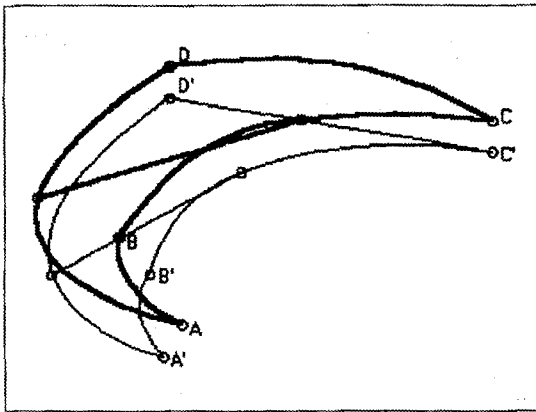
A top and bottom view of a flow passage in a centrifugal pump impeller (Top plane drawn by a thick pen, bottom plane drawn by a thin pen).
